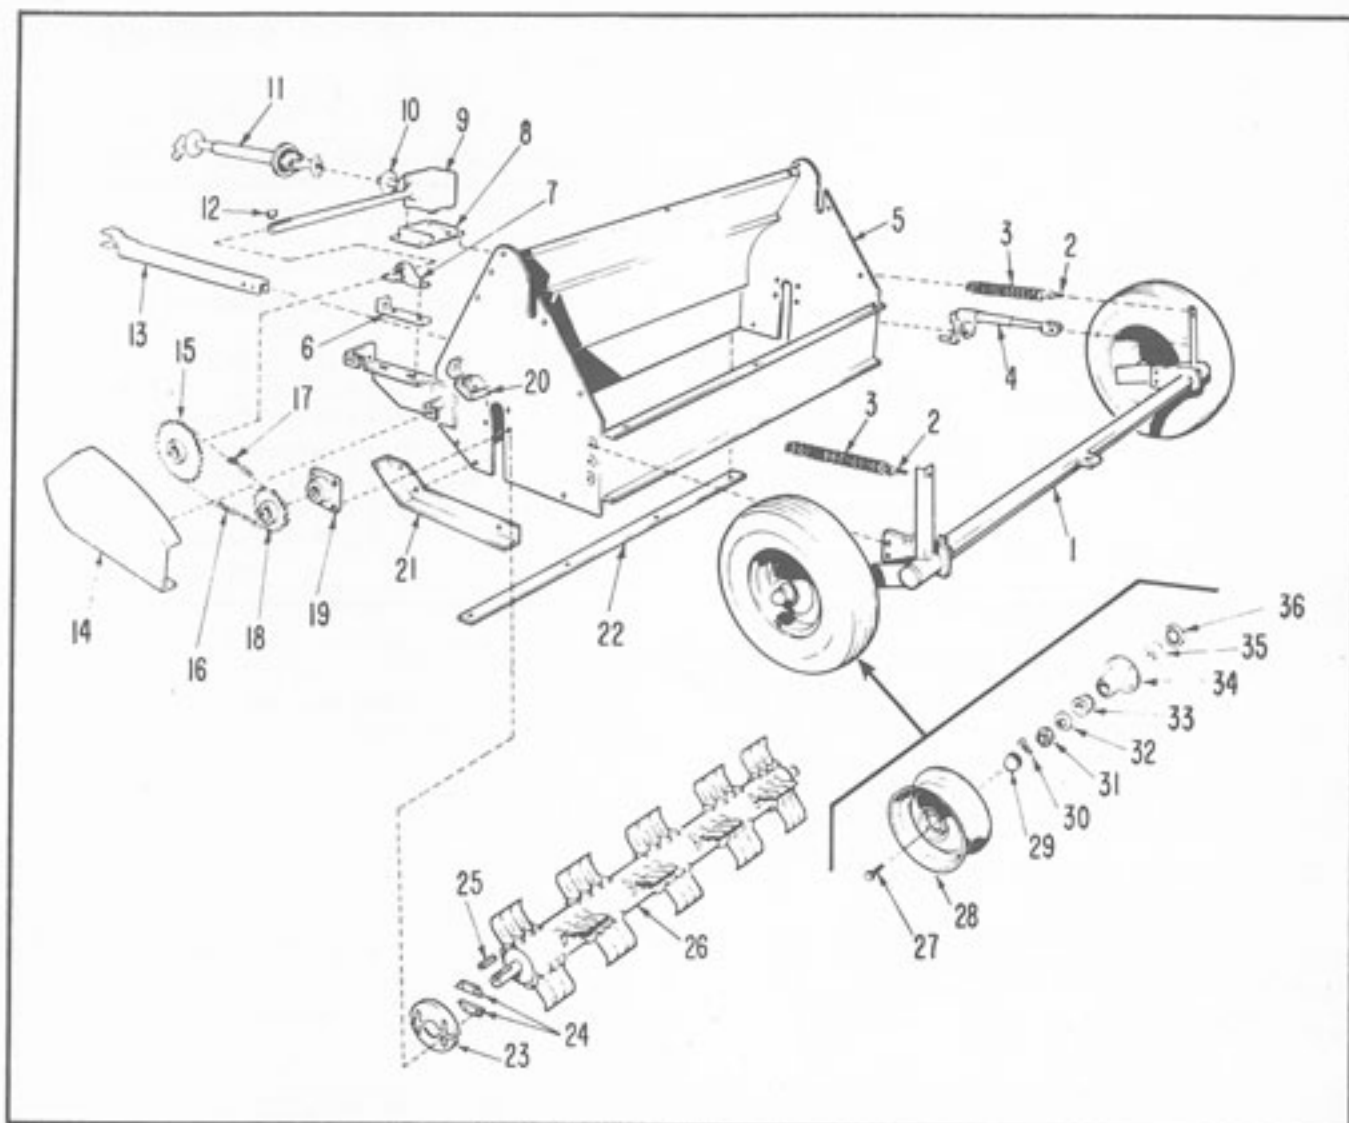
M-C CHOPPER MAJOR ASSEMBLIES
